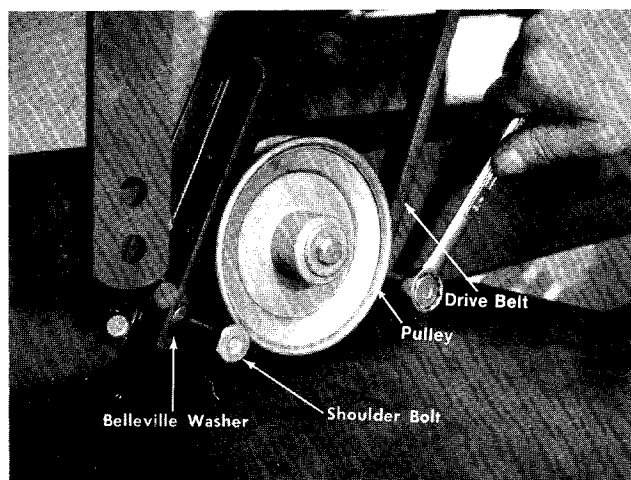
LIFT HANDLE SHAFT ASSEMBLY
